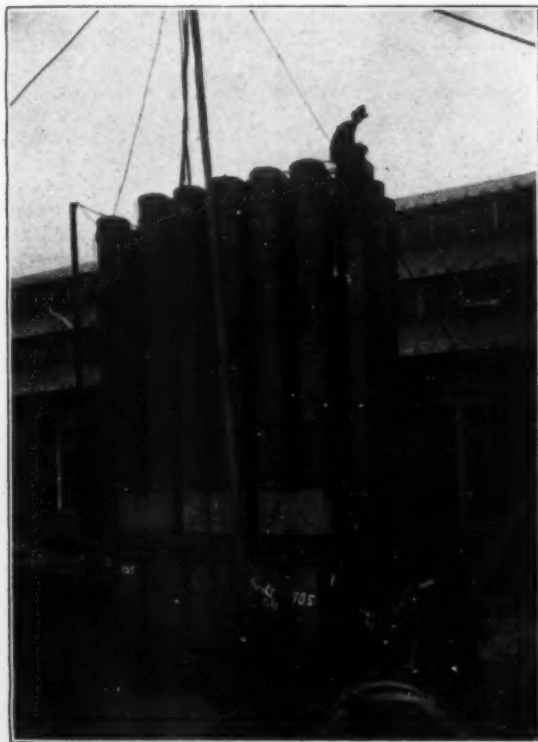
SIDE VIEW OF FURNACE WITHOUT HOUSING.
